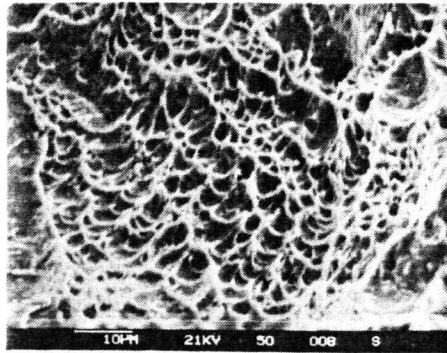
Fracture mode in base material of cross-weld joint sample
